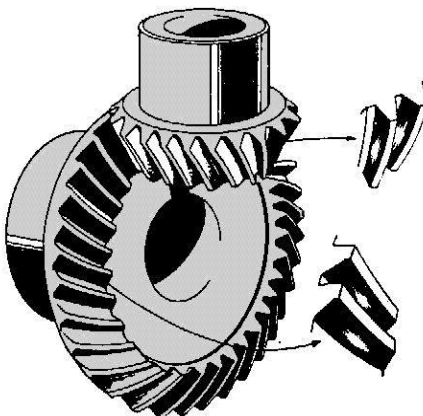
For units using spiral tooth bevel gears in lower unit, mesh pattern should be as shown above.
